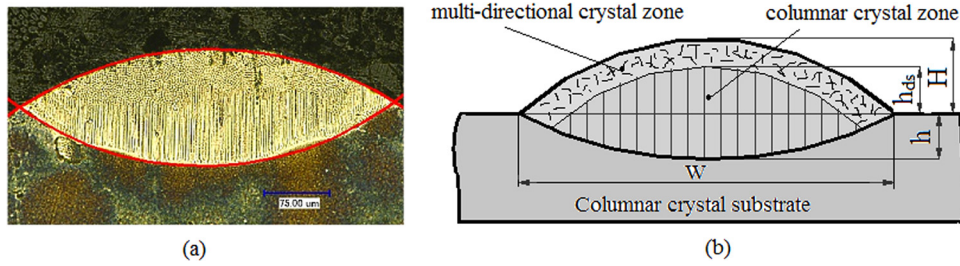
Typical sketch of the cross section of single cladding track. (a) The typical sketch of the cross section of the cladding track; (b) the cladding track cross section morphology.
